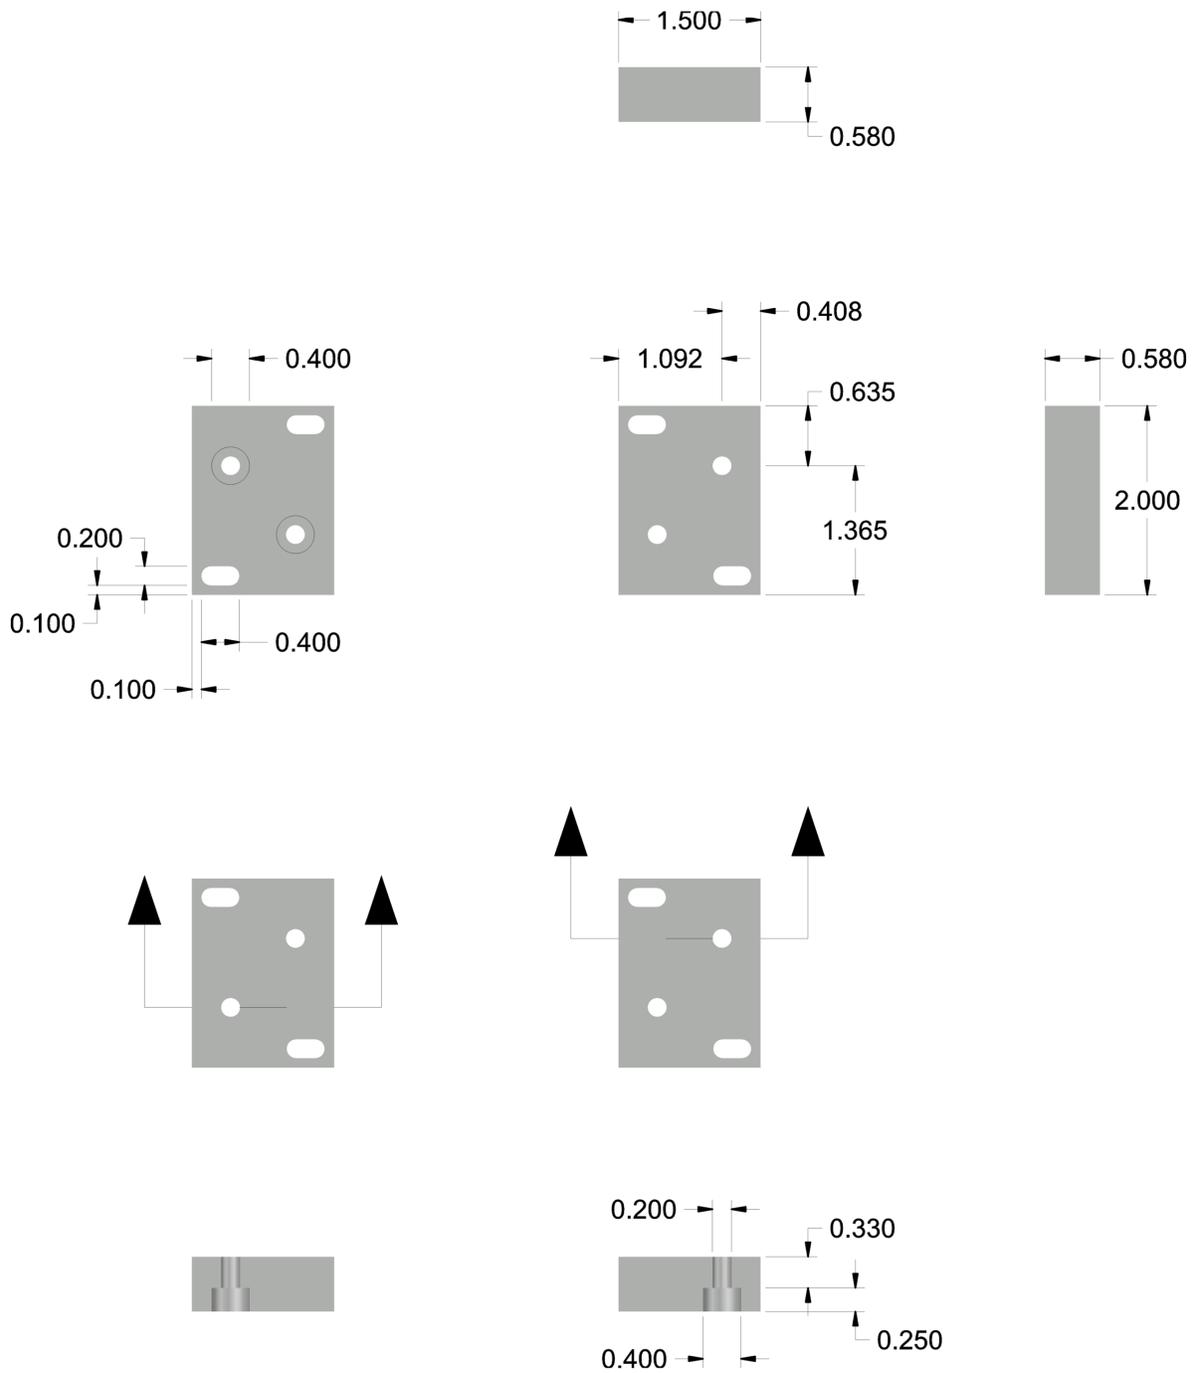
Orthographic drawings of mounting blocks for two-way manual valves
